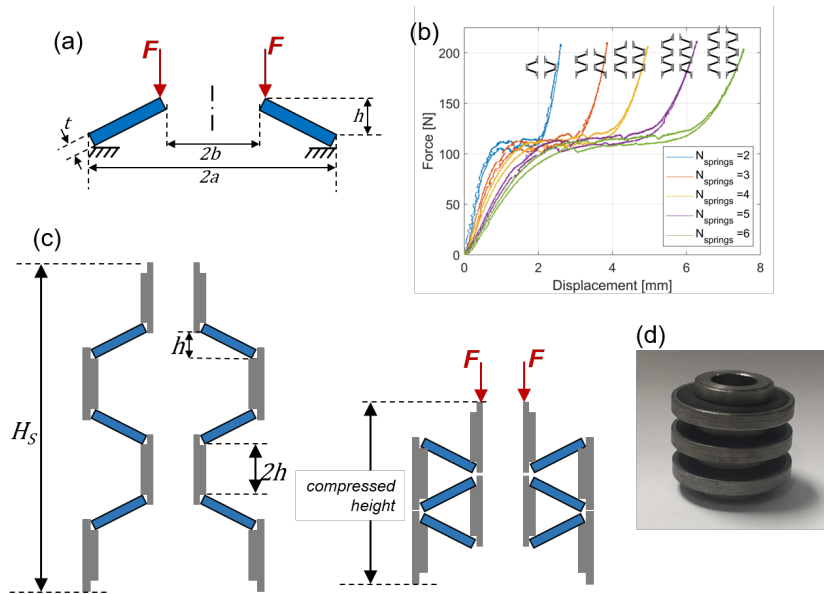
Geometry and loading method of a cone disc spring (a), load-deflection behavior of disc spring stacks for different number of springs (b), geometry and compression of disc spring stack with spacers (c), and physical prototype of disc spring stack (d).
